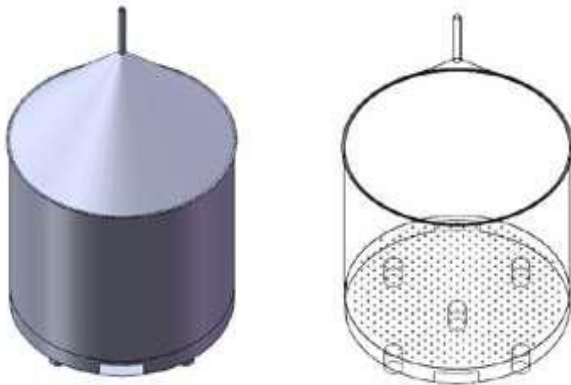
Assembled view of fabricated metal kiln for pyrolysis
